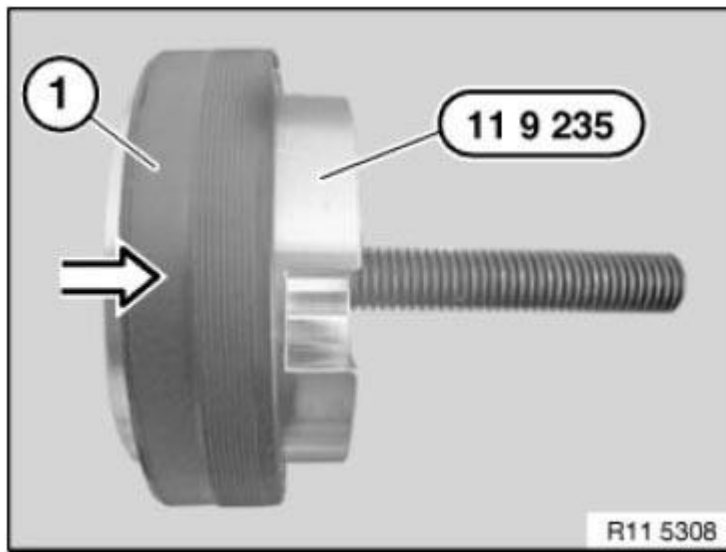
Pushing Radial Shaft Seal 11 9 235 Carefully On Special Tool
